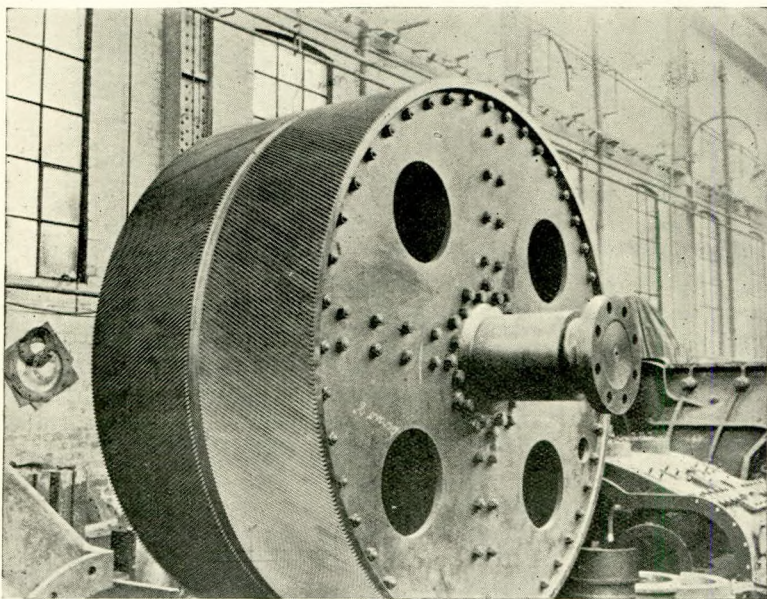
Main gear wheel for single screw ship of 6,000 S.H.P.
